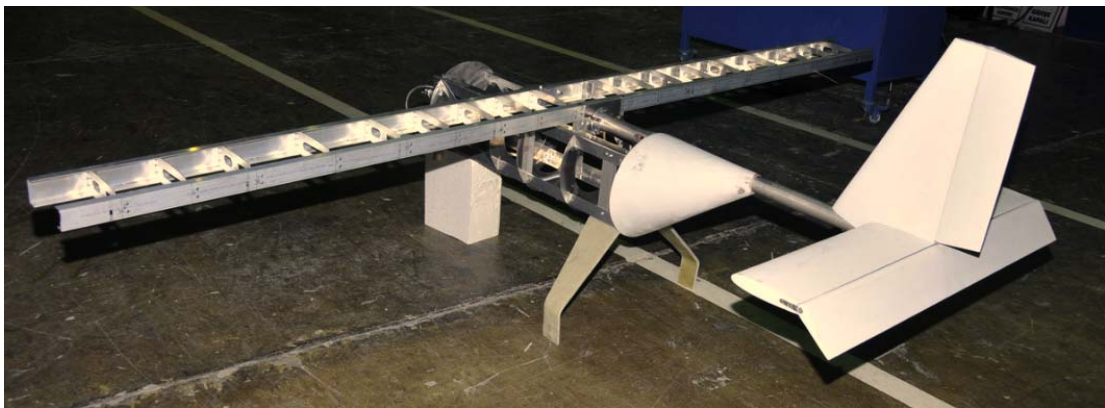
Assembly of UAV without Fuselage and Wing Skin
